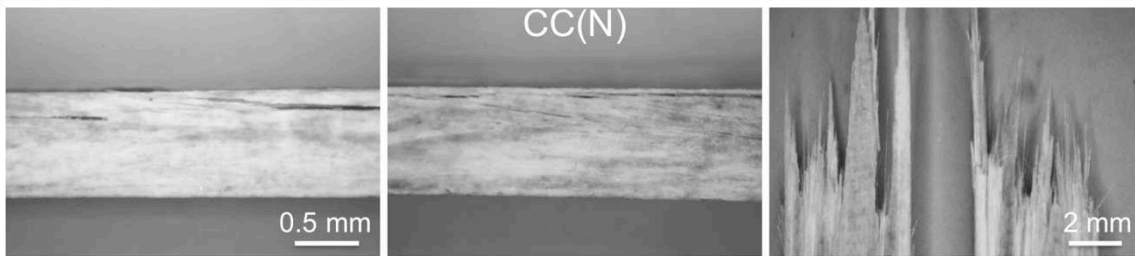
Typical damage in CC(N) composites as observed on the sides (left and center images) and fracture surfaces (far right image) of CC(N) specimens.
